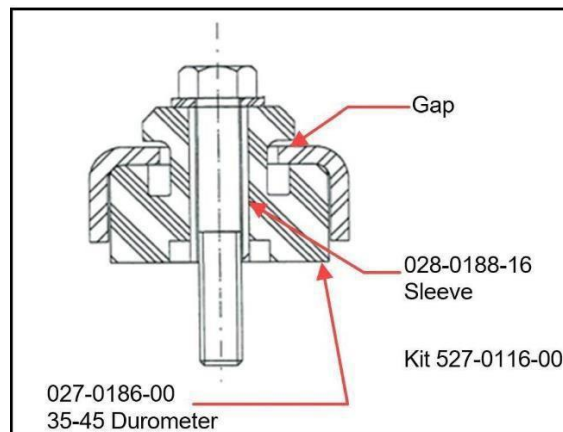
ZS21KAE to ZS33KAE Refrigeration Scroll 63 Frame Condensing Unit Mounting
